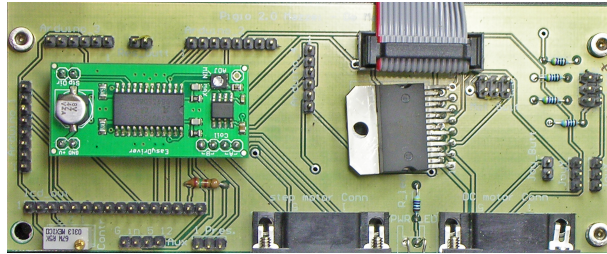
The P.GIO interface board equipped with the motor drivers during the assembly phase.
